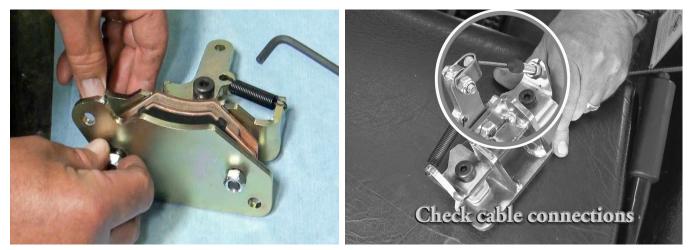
Photo 911.Locate mounting hardware and spacers to remount bracket to transmission. Photo 10
